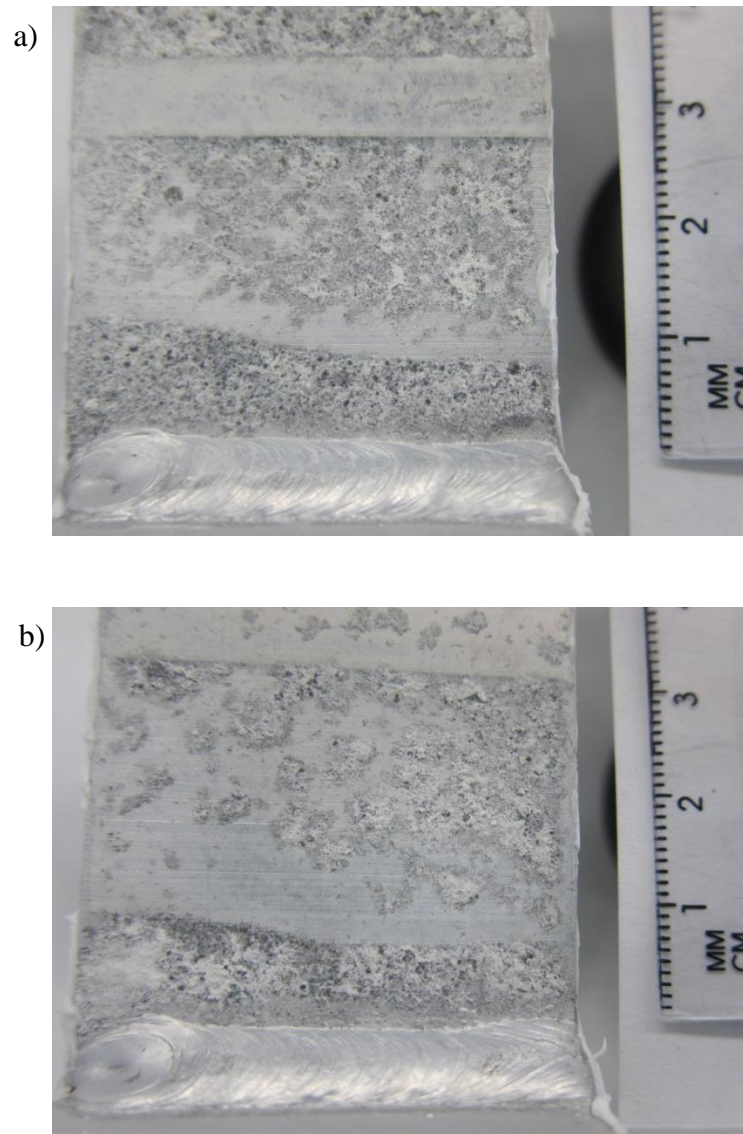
Close-up images of duplicate samples of T-joint welded configuration H3 (ER5356/AA7003/≡) in the as-welded T6+PB condition.
